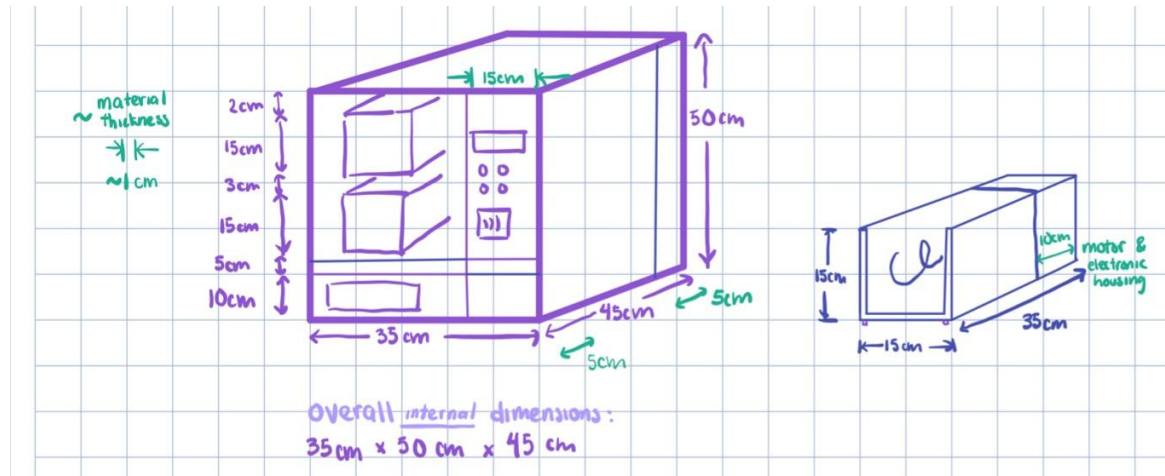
Physical Dimension and Design of Medical Kit Dispenser
